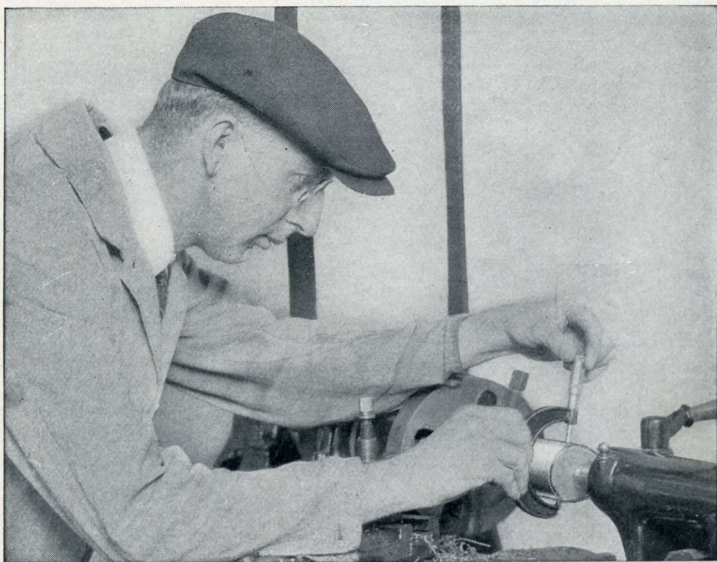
Using a Micrometer Caliper Measuring Work in the Lathe
